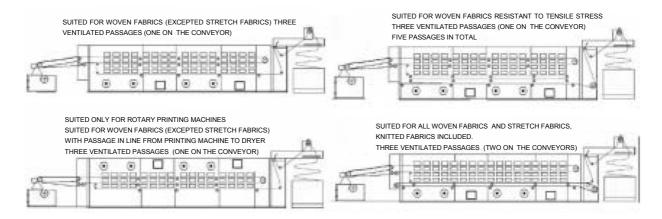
Drying lofts for mechanized flat printing and rotary printing machines
